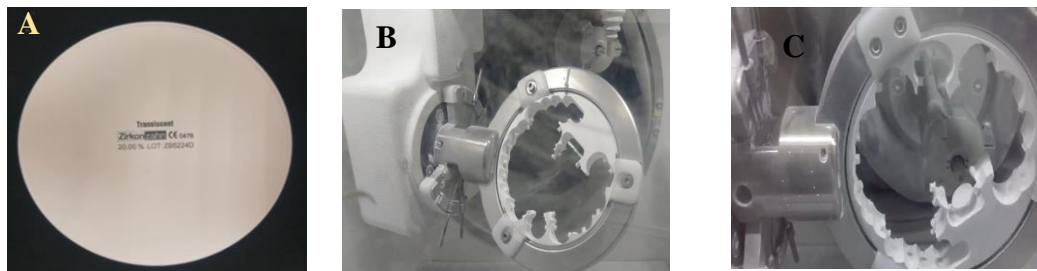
(A) Zirconia translucent blank before milling CAD/CAM milling machine (B and C)start milling the blank to shape it as discs.
